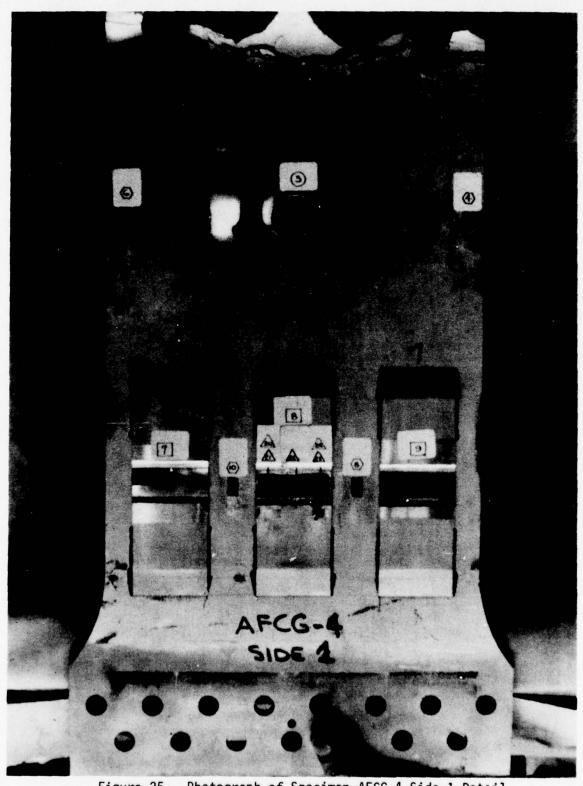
Photograph of Specimen AFCG-4 Side 1 Detail
